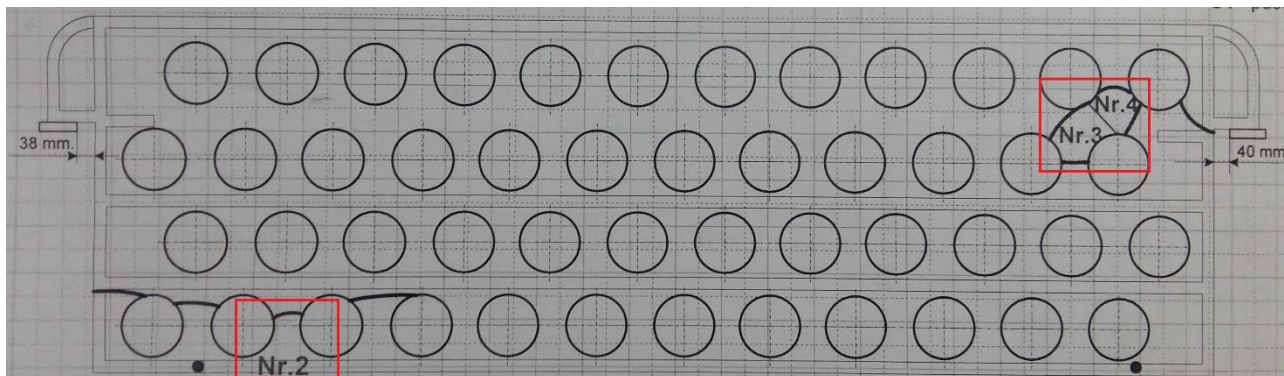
The scheme the tubes sheet of the coil tube in the furnace with cracks No. 2, 3, 4
